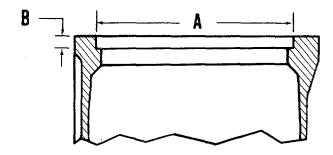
C-3. Cylinder Liner Counterbore Dimension Location
